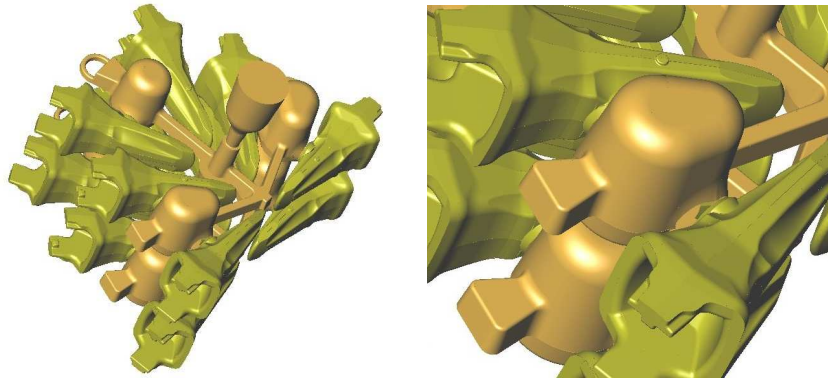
Sand gravity casting. CAD geometry of the foundry system.
